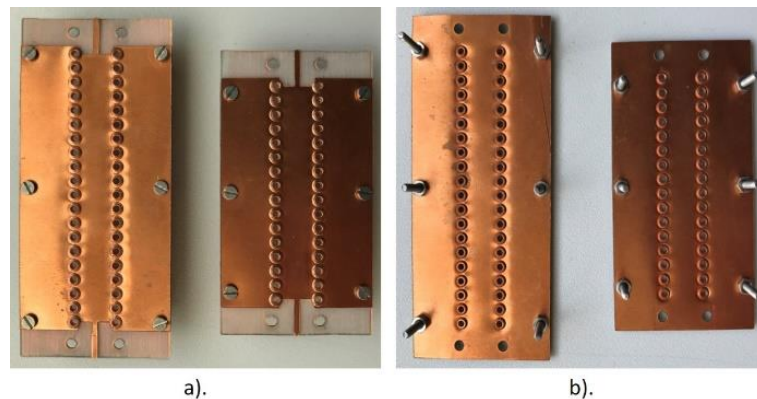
Assembled 3D printed hollow waveguide prototypes a) Top view, b) Bottom view
